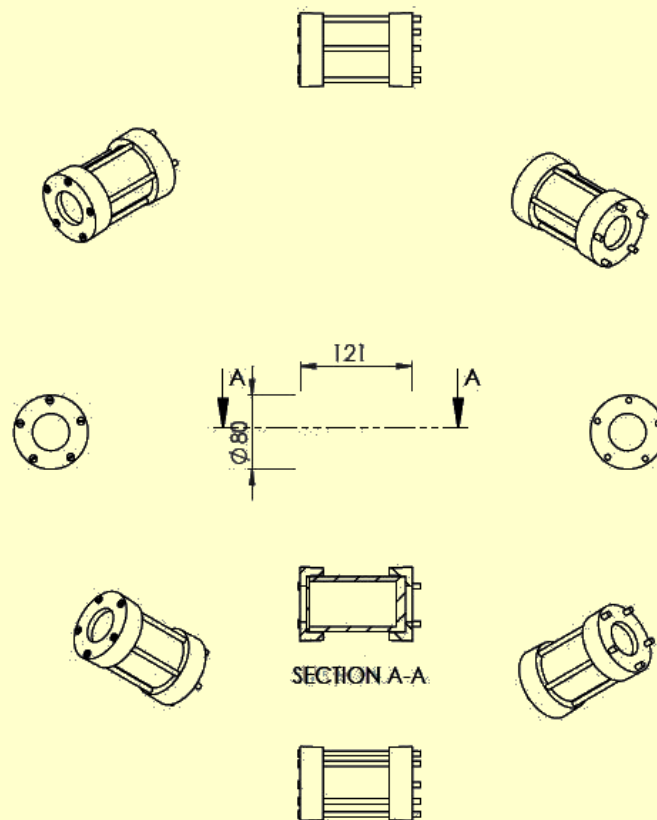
Pictures cad to sealing camera designed with the solid works software
